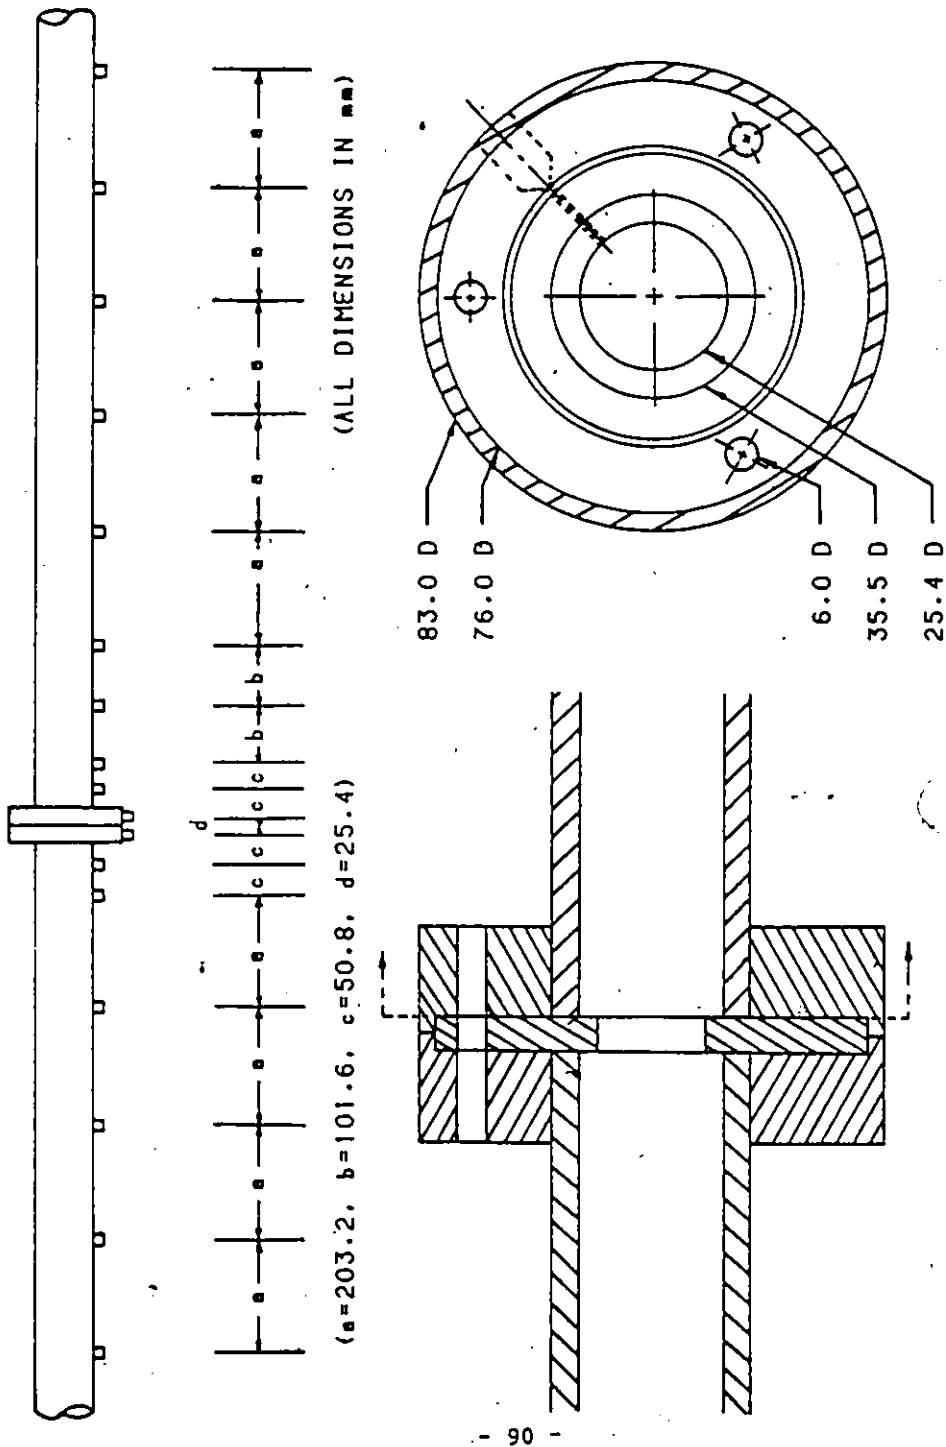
Test-section and Flange Assembly in Experiment A.
